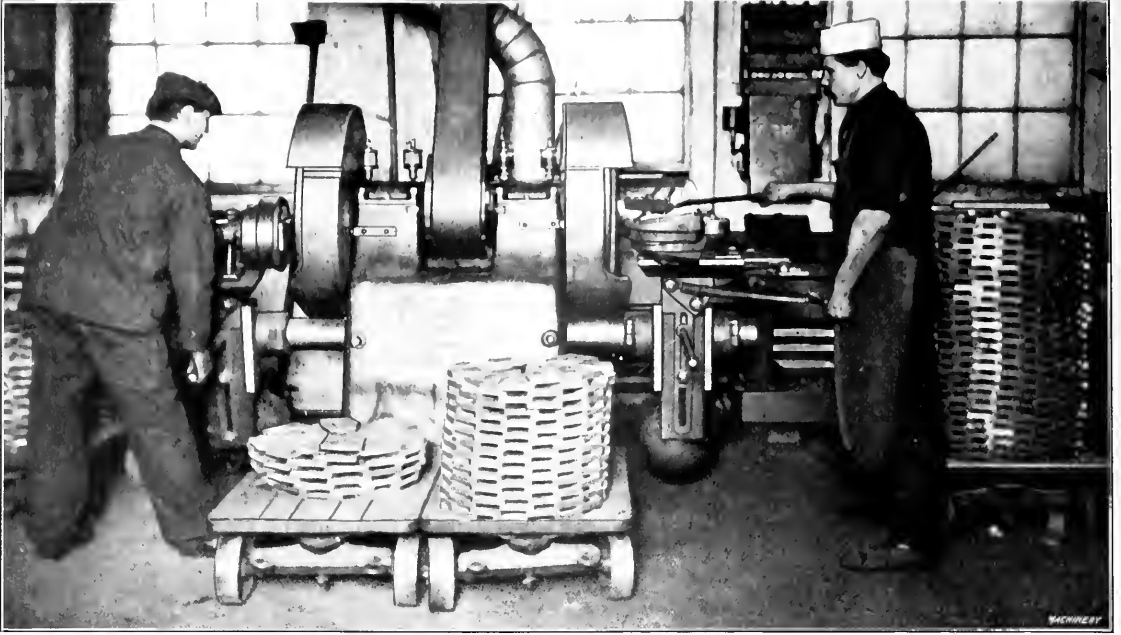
Finishing Sad Irons on a Ring-wheel Grinder
